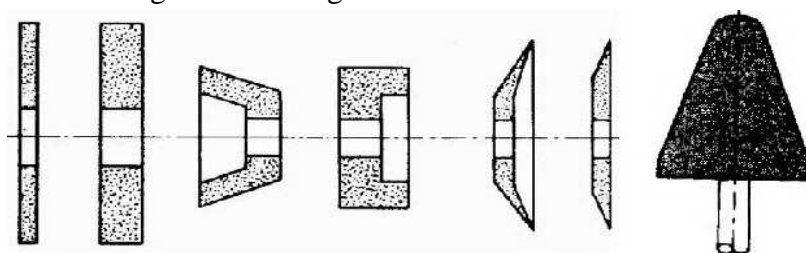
Standard wheel configuration for conventional grinding wheels
